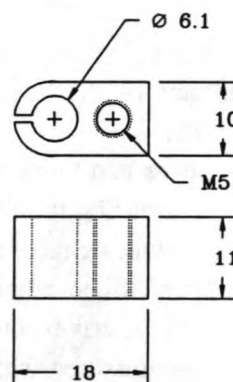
Top and side views of the PVC holder which was used to position the pore-pressure transducer (dimensions in mm).
